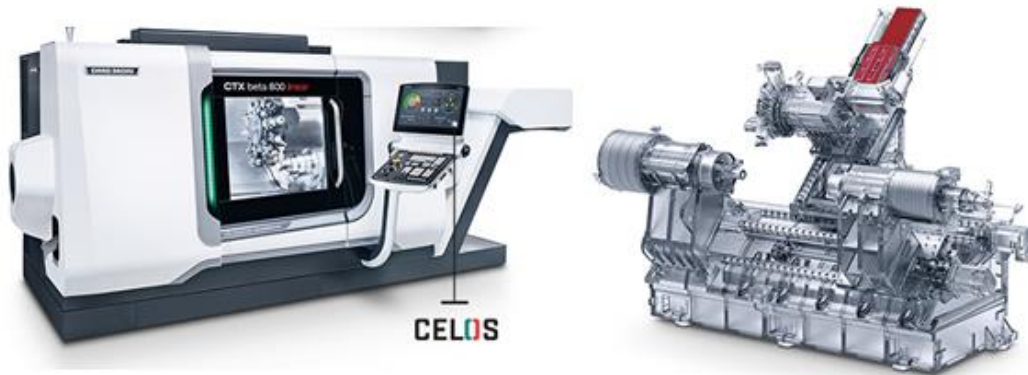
Example of a cutting machine tool and its interior: CNC Turning machine. [DGM Mori Seiki]
